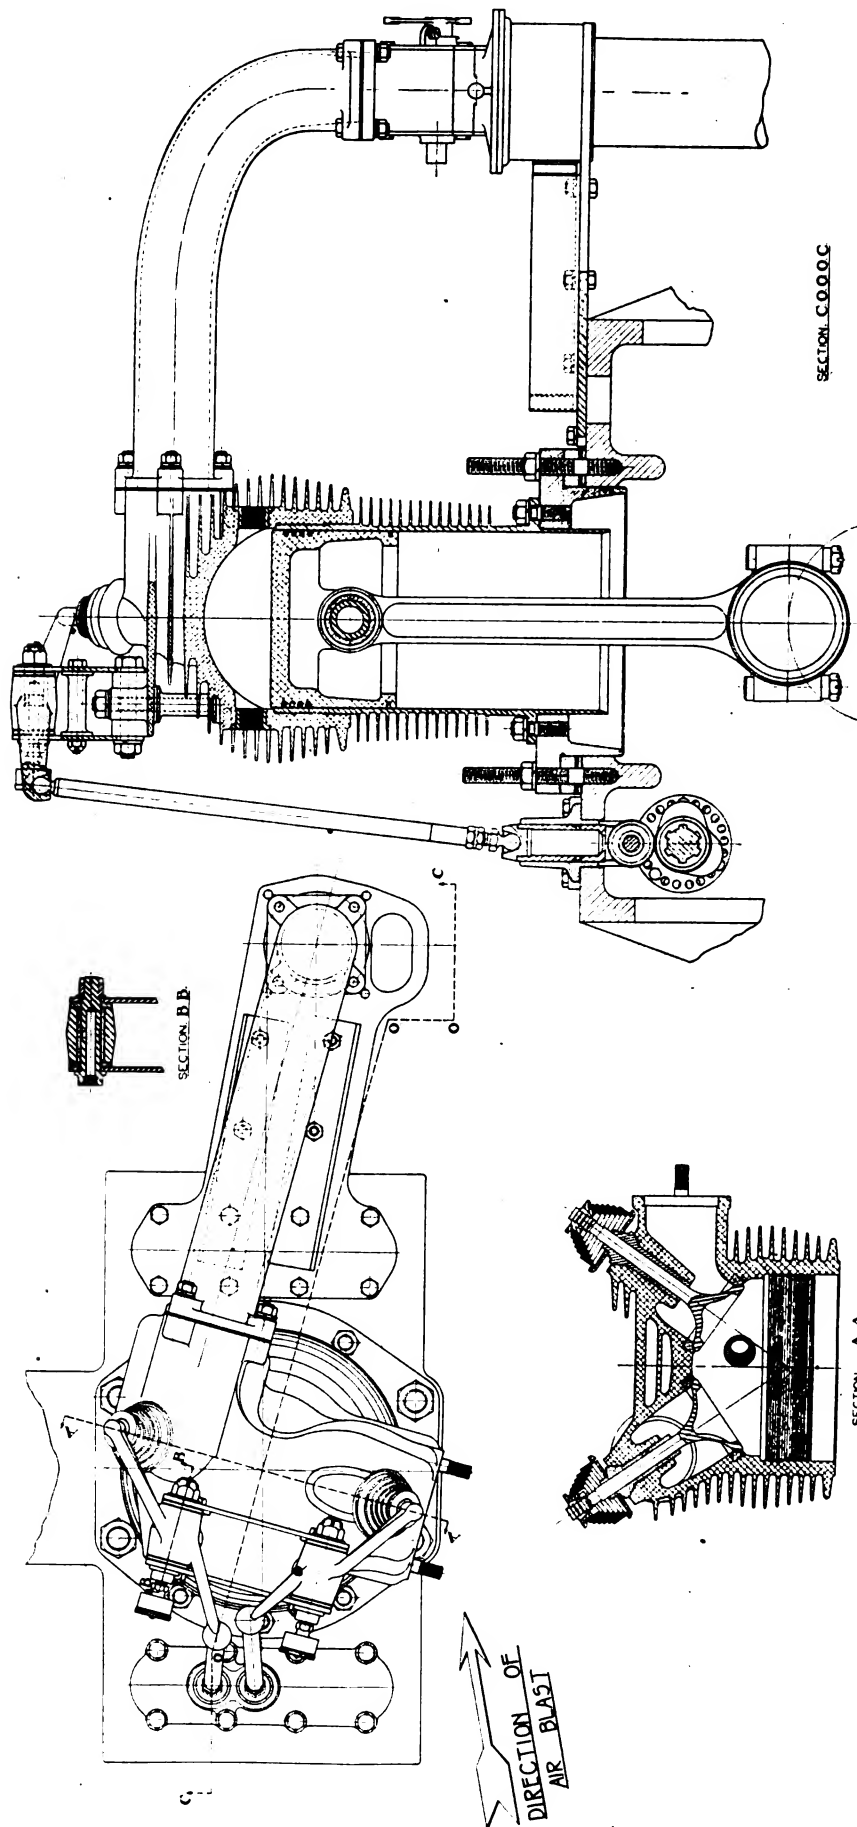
ASSEMBLY DRAWING OF THE TYPE J AIR-COOLED CYLINDER DEVELOPED BY THE ENGINEERING DIVISION OF THE AIR SERVICE
